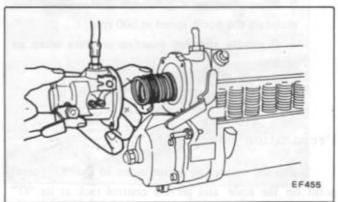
Adjusting high-speed control (Pneumatic governor section)
